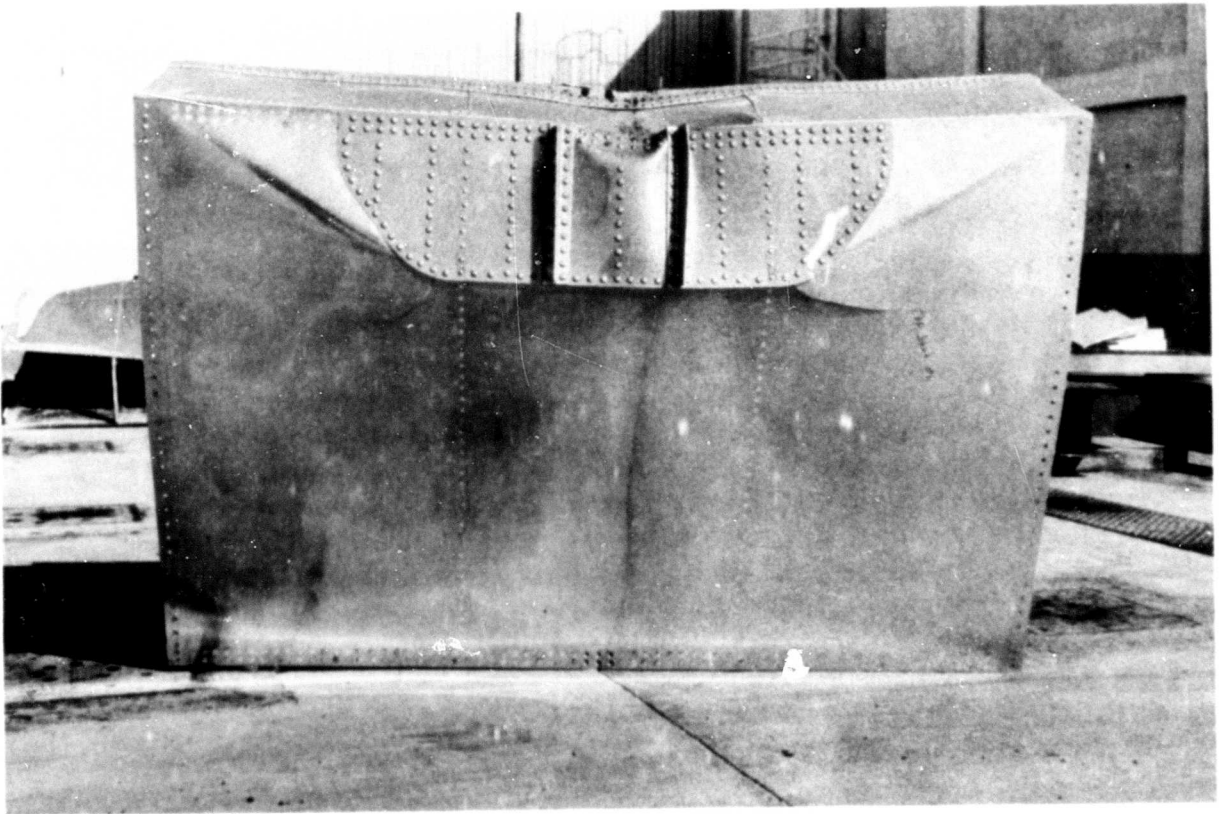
Failure of Tank No. 2. Failure of upper surface after Drop 10, log impact — 6-ft. drop height, impact load 52,700 lb.
